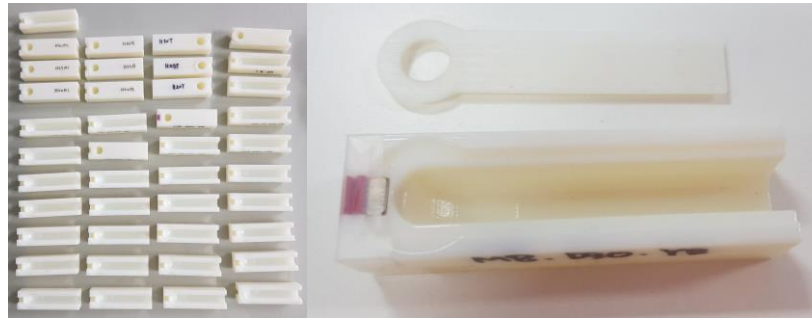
Test beds (left) and test bed example photo (right) for parametric design
